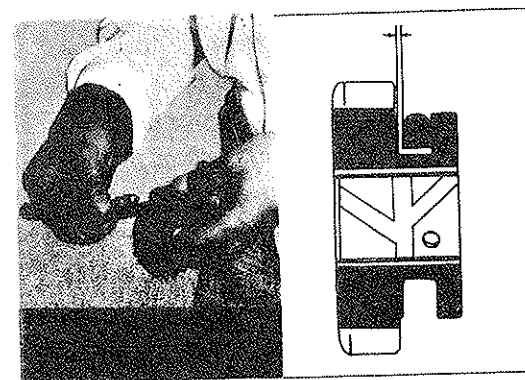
Checking of Clearance Between Reverse Shift Pin and Idler Gear
